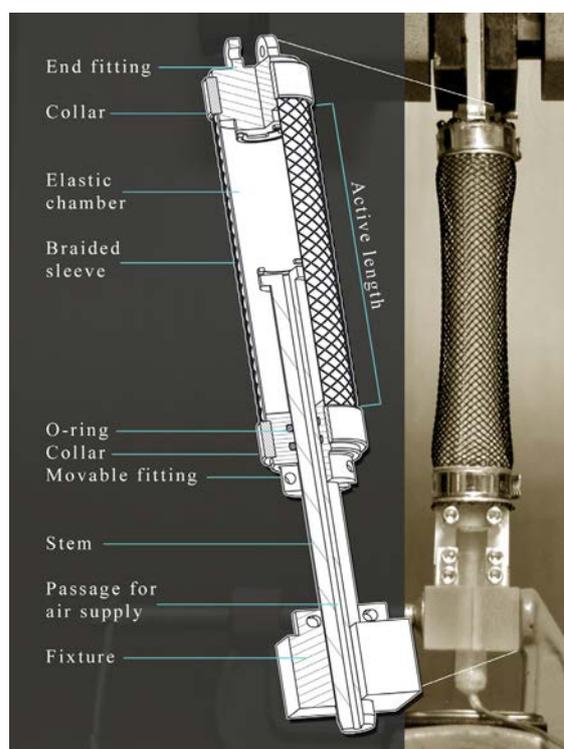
Actuator design schematics. Physical prototype and sectioned CAD rendering.
